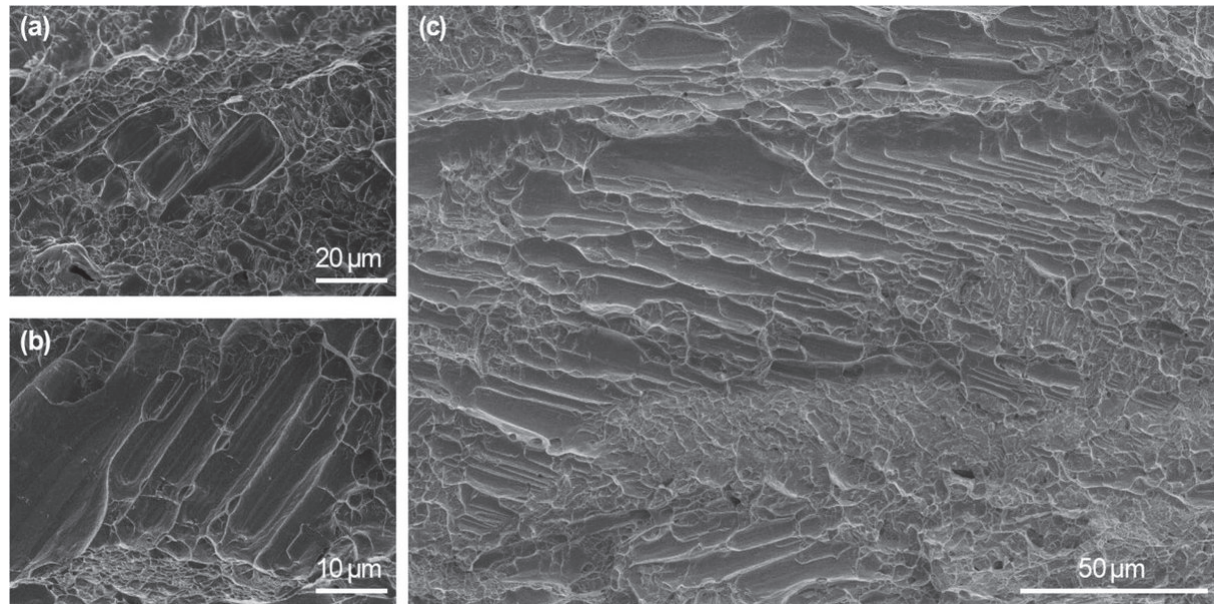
Example of a fracture surface showing typical features observed in additively manufactured materials.
